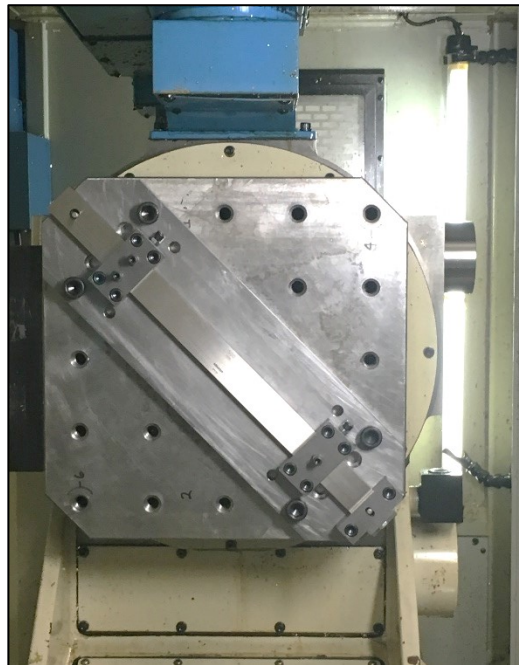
Gauge block measured with an MP700 Renishaw probe on a Mitsui Seiki HU40-T machine tool of a wCBXbZY(C1)t topology
